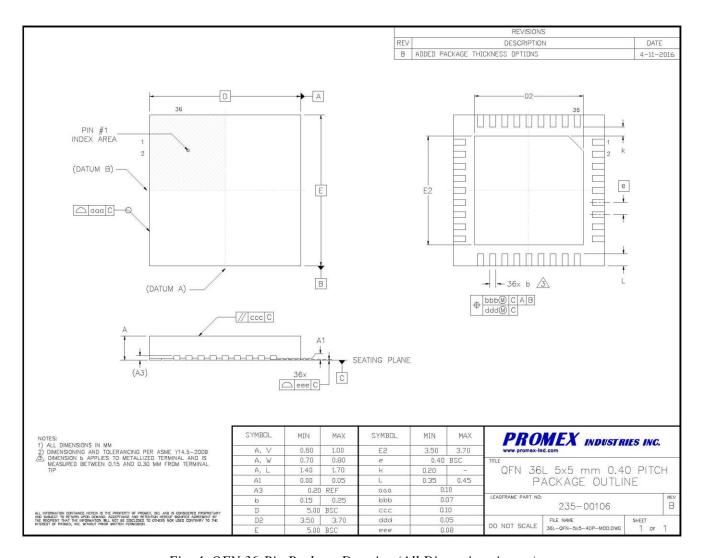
QFN 36-Pin Package Drawing (All Dimensions in mm)
